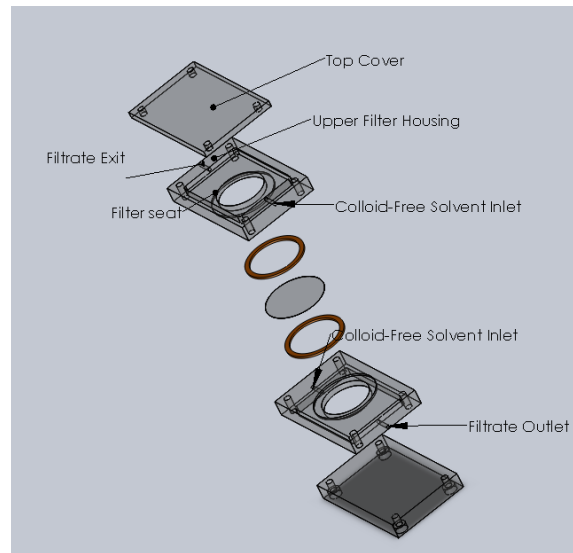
Solidworks™ sketch of one initial model in exploded view.
